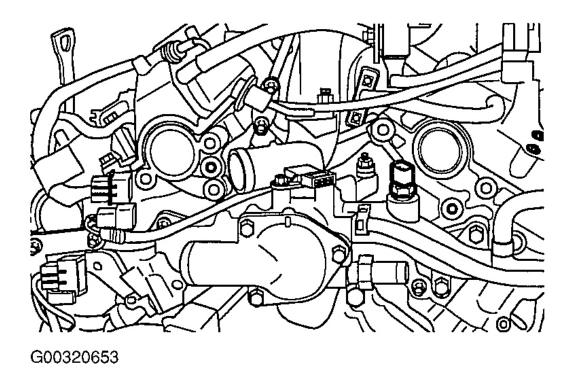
Disconnecting Wiring Harness Courtesy of KIA MOTORS AMERICA, INC.
